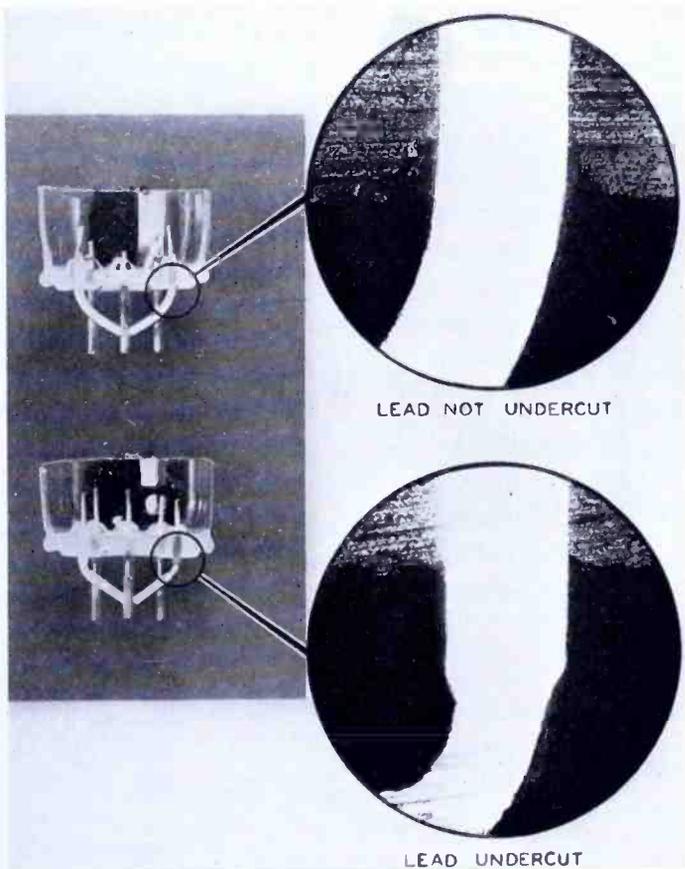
Photographs showing how undercutting leads of miniature stems protects the glass seal under extreme conditions of bending.
